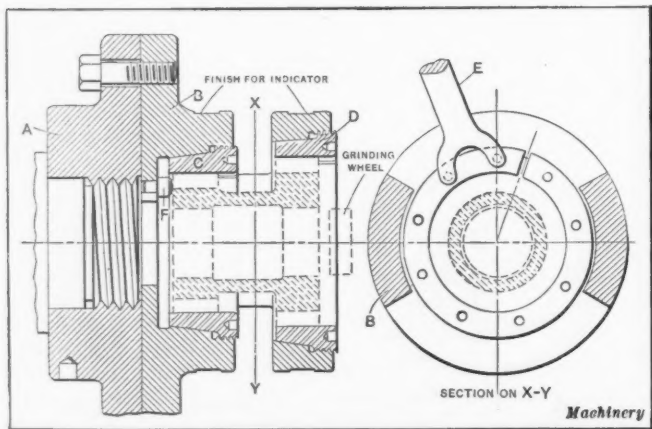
Special Type of Chuck for holding Double Spur Gear, made by Heald Machine Co.
